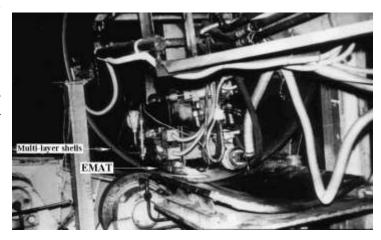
EMA in-production testing of multi-layer shell weld seam
